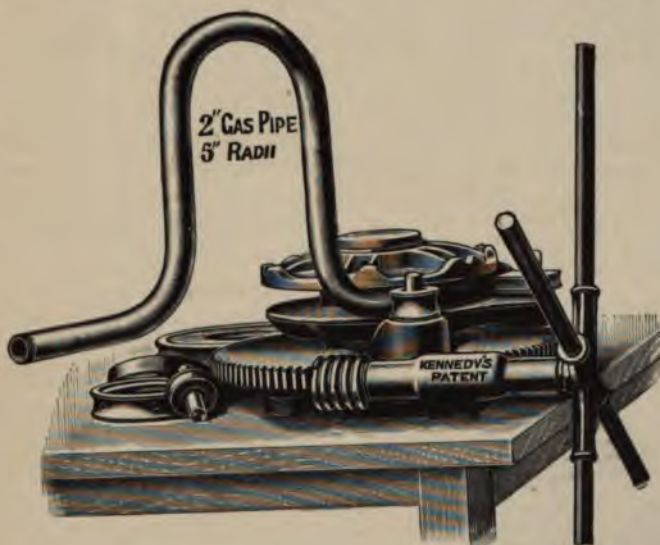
Kennedy's Patent Pipe-bending Machine
